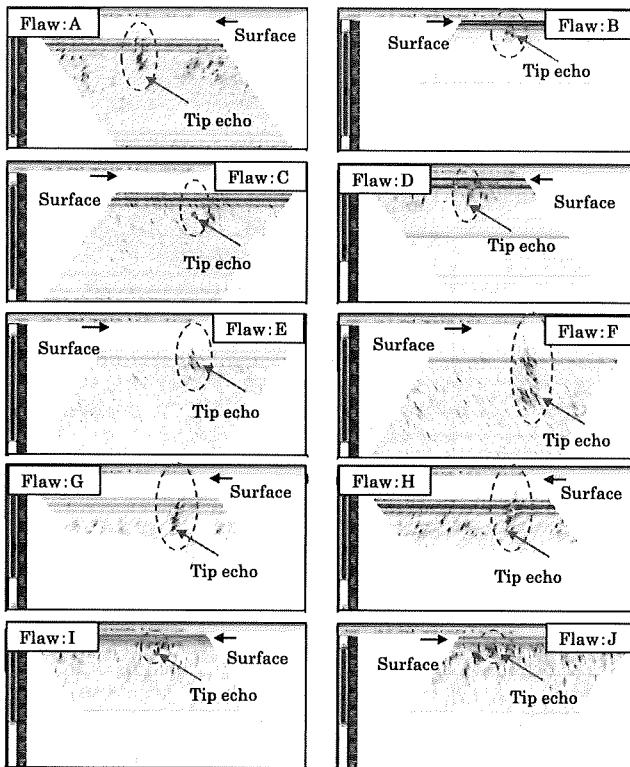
B-scan images of nickel based alloy weld specimen with SCC cracks by Phased Array UT
